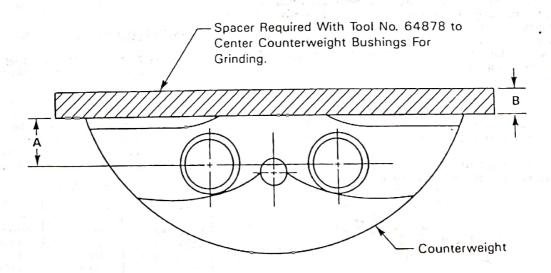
(Revised) Identification of Dimension "A" and "B" (From Supplement No. 2 to Service Instruction No. 1143B, included for reference purposes)
